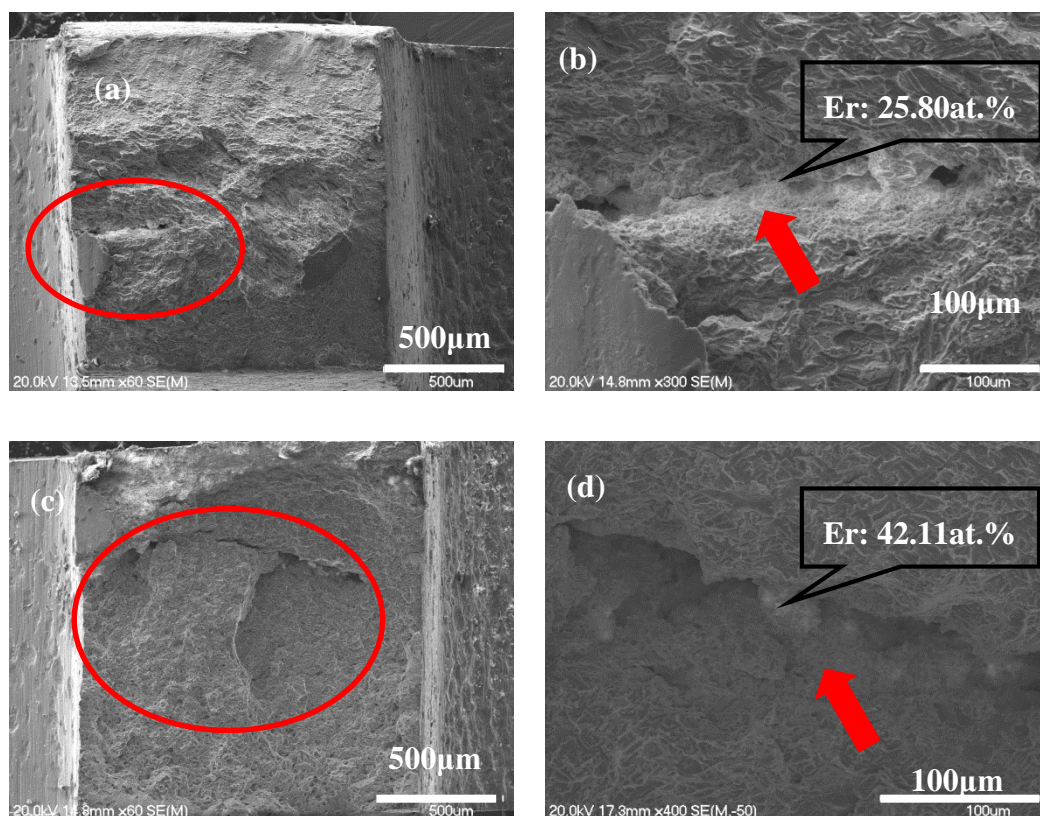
Fracture surfaces of test pieces cut from as-forged Ti-0.4Er alloys (a) No.1; (b) the crack in Fig. 7.6 (a), indicating the existence of ER segregation. (c) No.3; (d) the crack in Fig.
